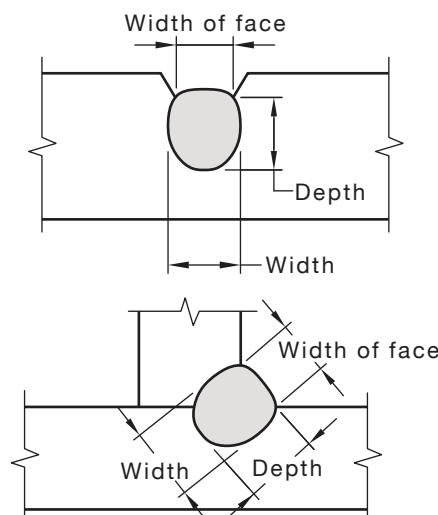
UNACCEPTABLE WELD RUN IN WHICH DEPTH AND WIDTH EXCEED THE WIDTH OF THE WELD FACE
